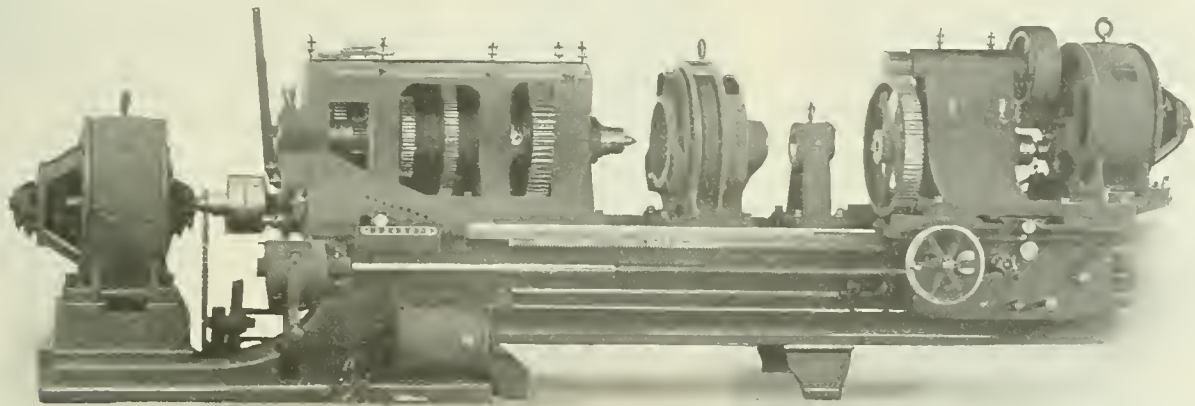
Lodge & Shipley Lathe with Special Attachment for Drilling Locomotive Axles
